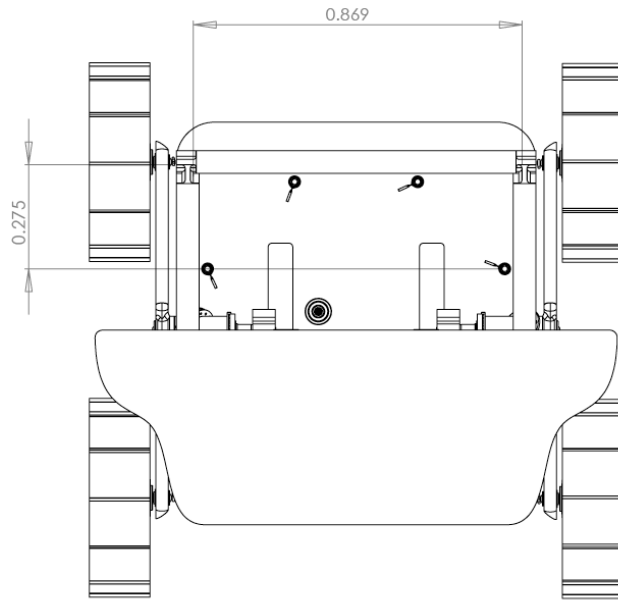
Rover side view with solar panels removed, dimensions in meters
